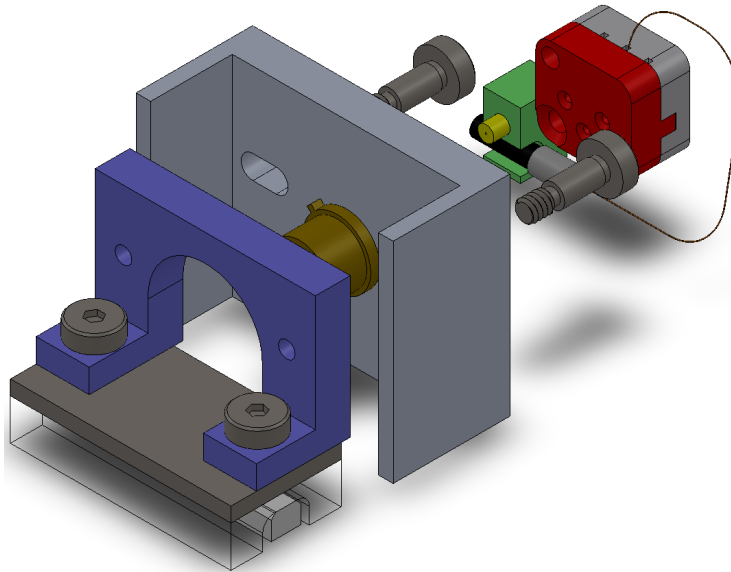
The carrier to base connection is accomplished with two shoulder bolts. The bolts provide alignment as well as holding the assembly together.
